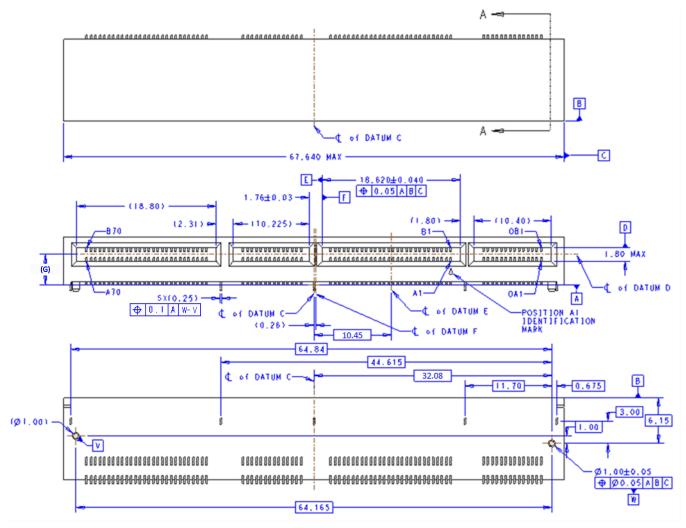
4C+ RIGHT ANGLE CONNECTOR DIMENSIONS
